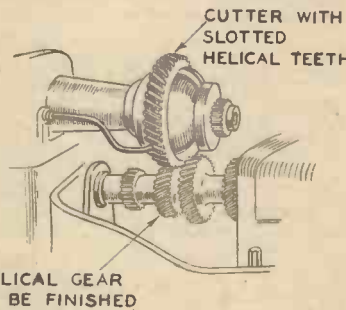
A cutter provided with grooved helical teeth rotates the gear wheel during the finishing operations. The cutter is not quite parallel to the wheel, so that a sliding and cutting action takes place between its teeth and those on the wheel
